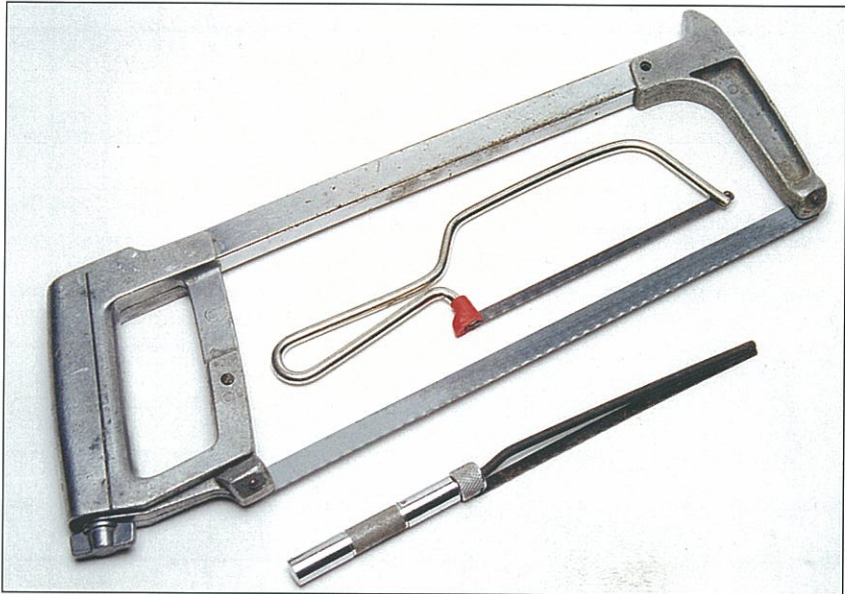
Metal-cutting saws. Large hacksaw, 'Junior' hacksaw, and a very useful handle for holding a 'Junior' hacksaw blade when sawing in tight corners. (Steve Williams)
